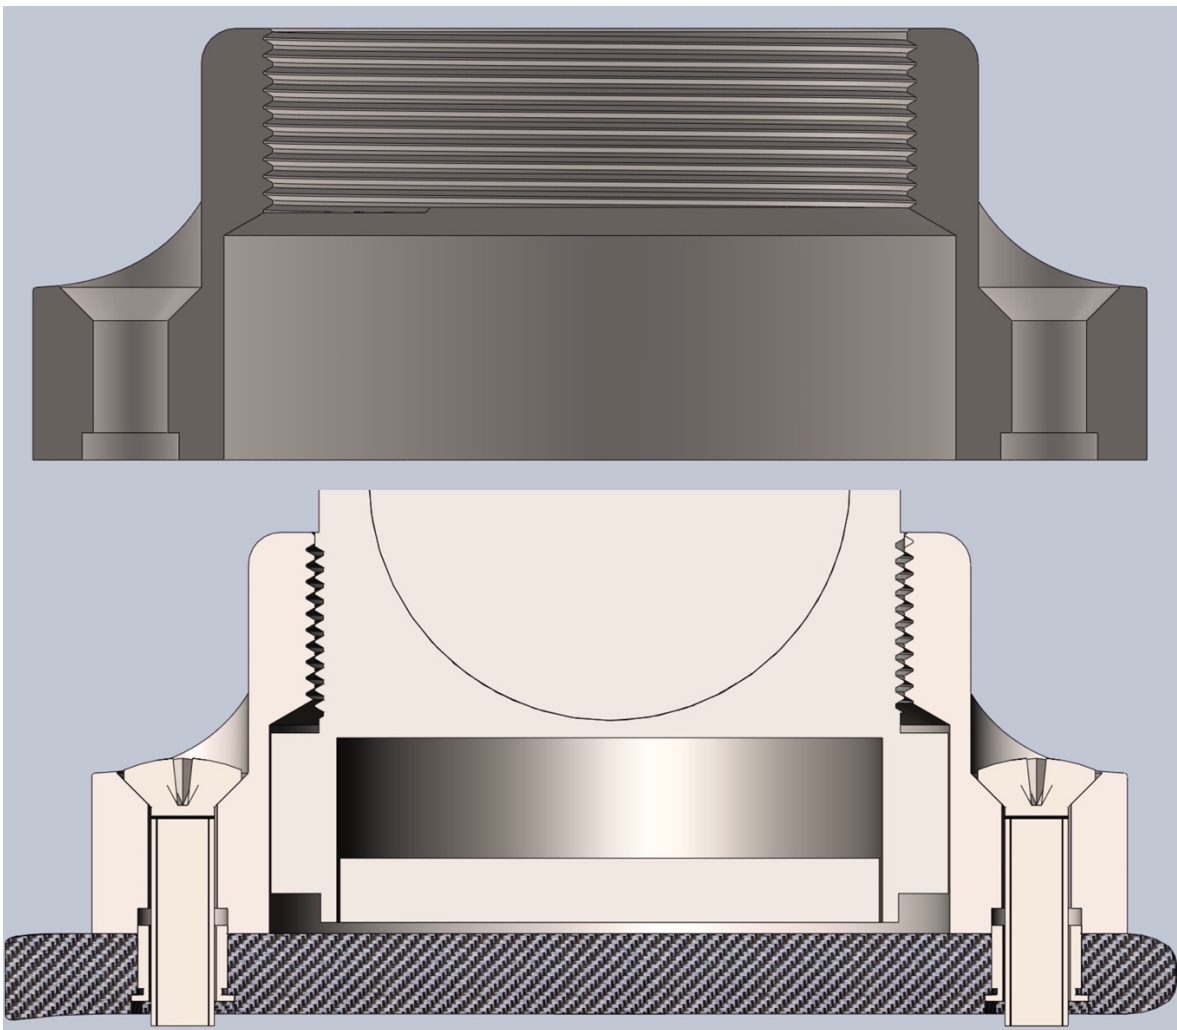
a) Ball Joint Housing Attachment Bracket Section View, b) Ball Joint Assembly Section View
